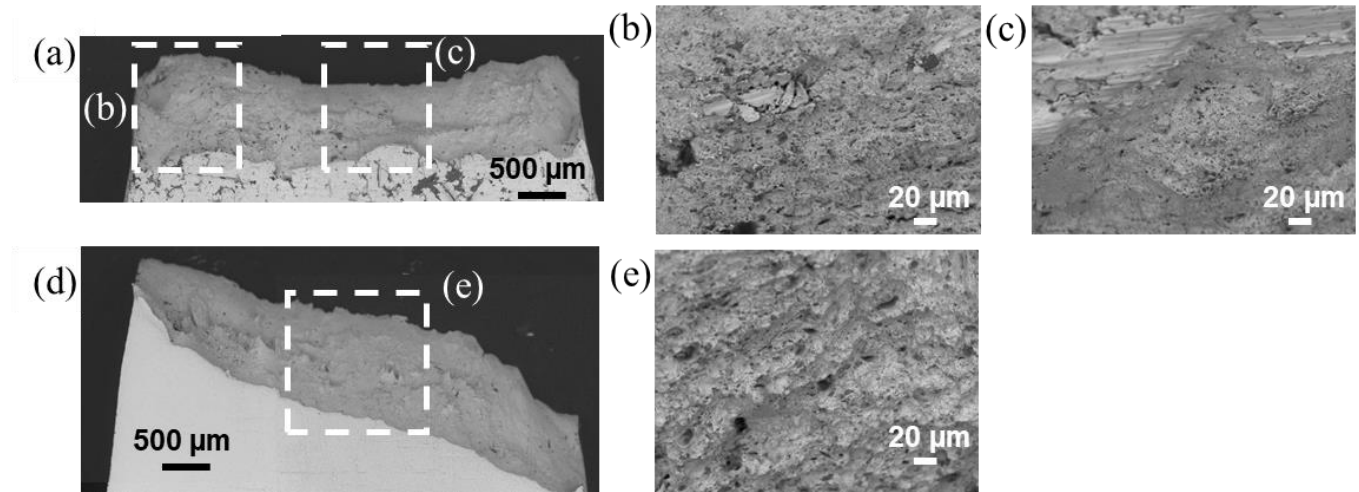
The fractured surfaces of the tested specimens. (a) front view of *high-LED*; (b-c) insets of top view for *high-LED*; (d) front view of *low-LED*; (e) inset of top view for *low-LED*.
